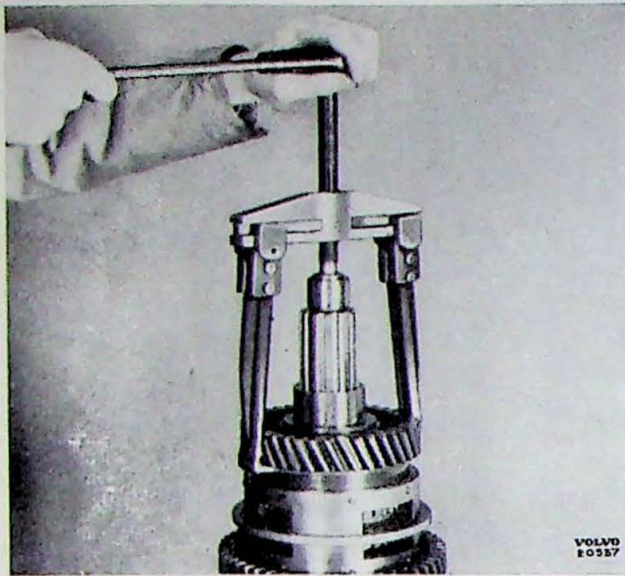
17. Removing the 3rd speed gear (4th on K 13).
